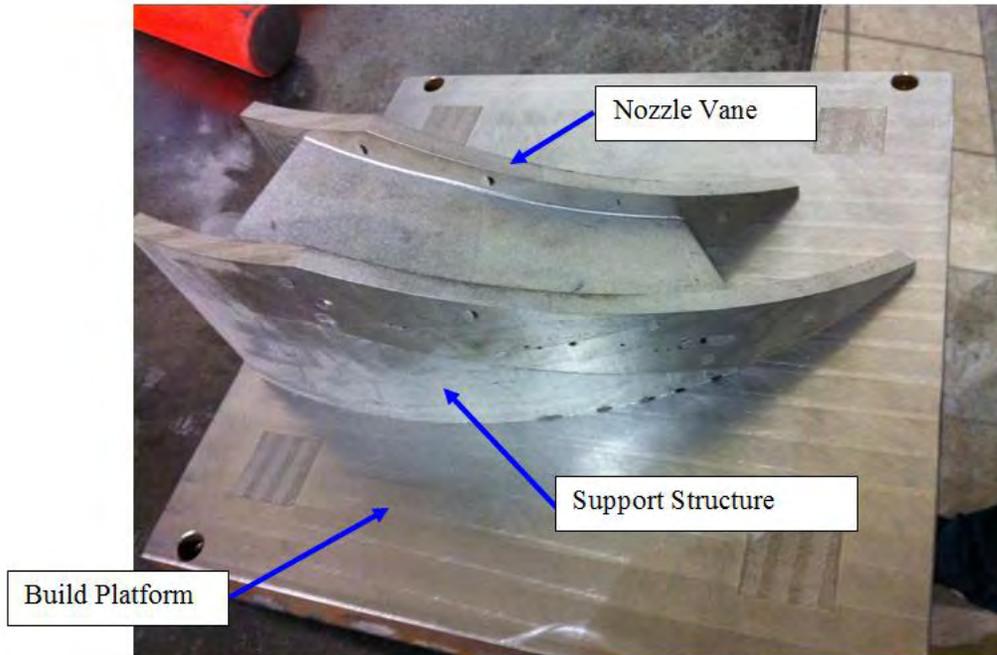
As-designed, as-printed nozzle vane on build platform.
